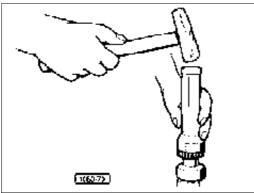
Installing the 1000.4 engine governor driving gear.
